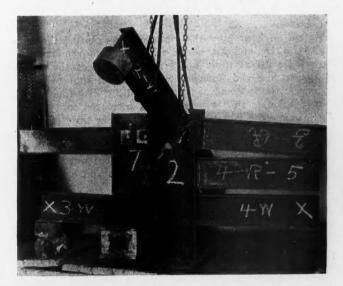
Welded Vibration Test Piece After the Second Test.
